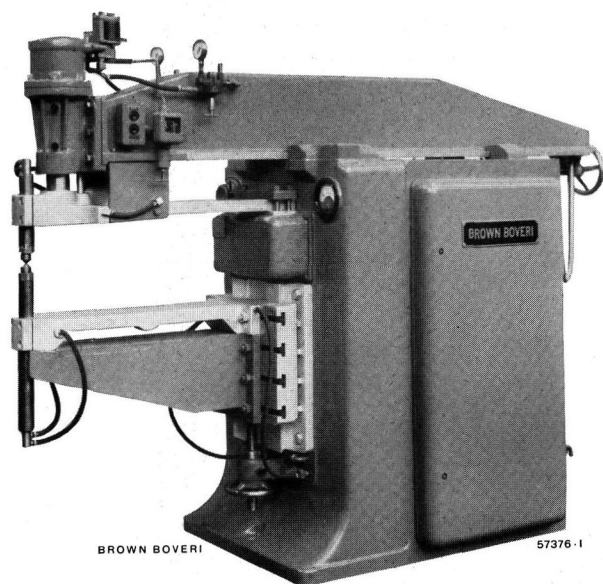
Spot welding machine for sheet aluminium up to 3 mm in thickness. Nominal rating 550 kVA with arms 1600 mm long and 430 mm apart.
